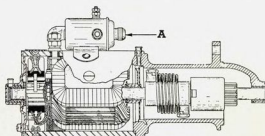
Auto-Lite MAW-4021 Starter Used on Model 1900-1901
